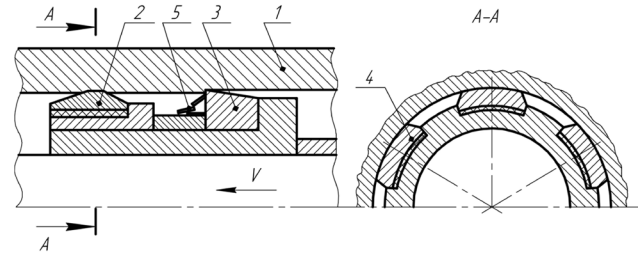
Machining a cast-iron sleeve using a deforming-cutting broach
